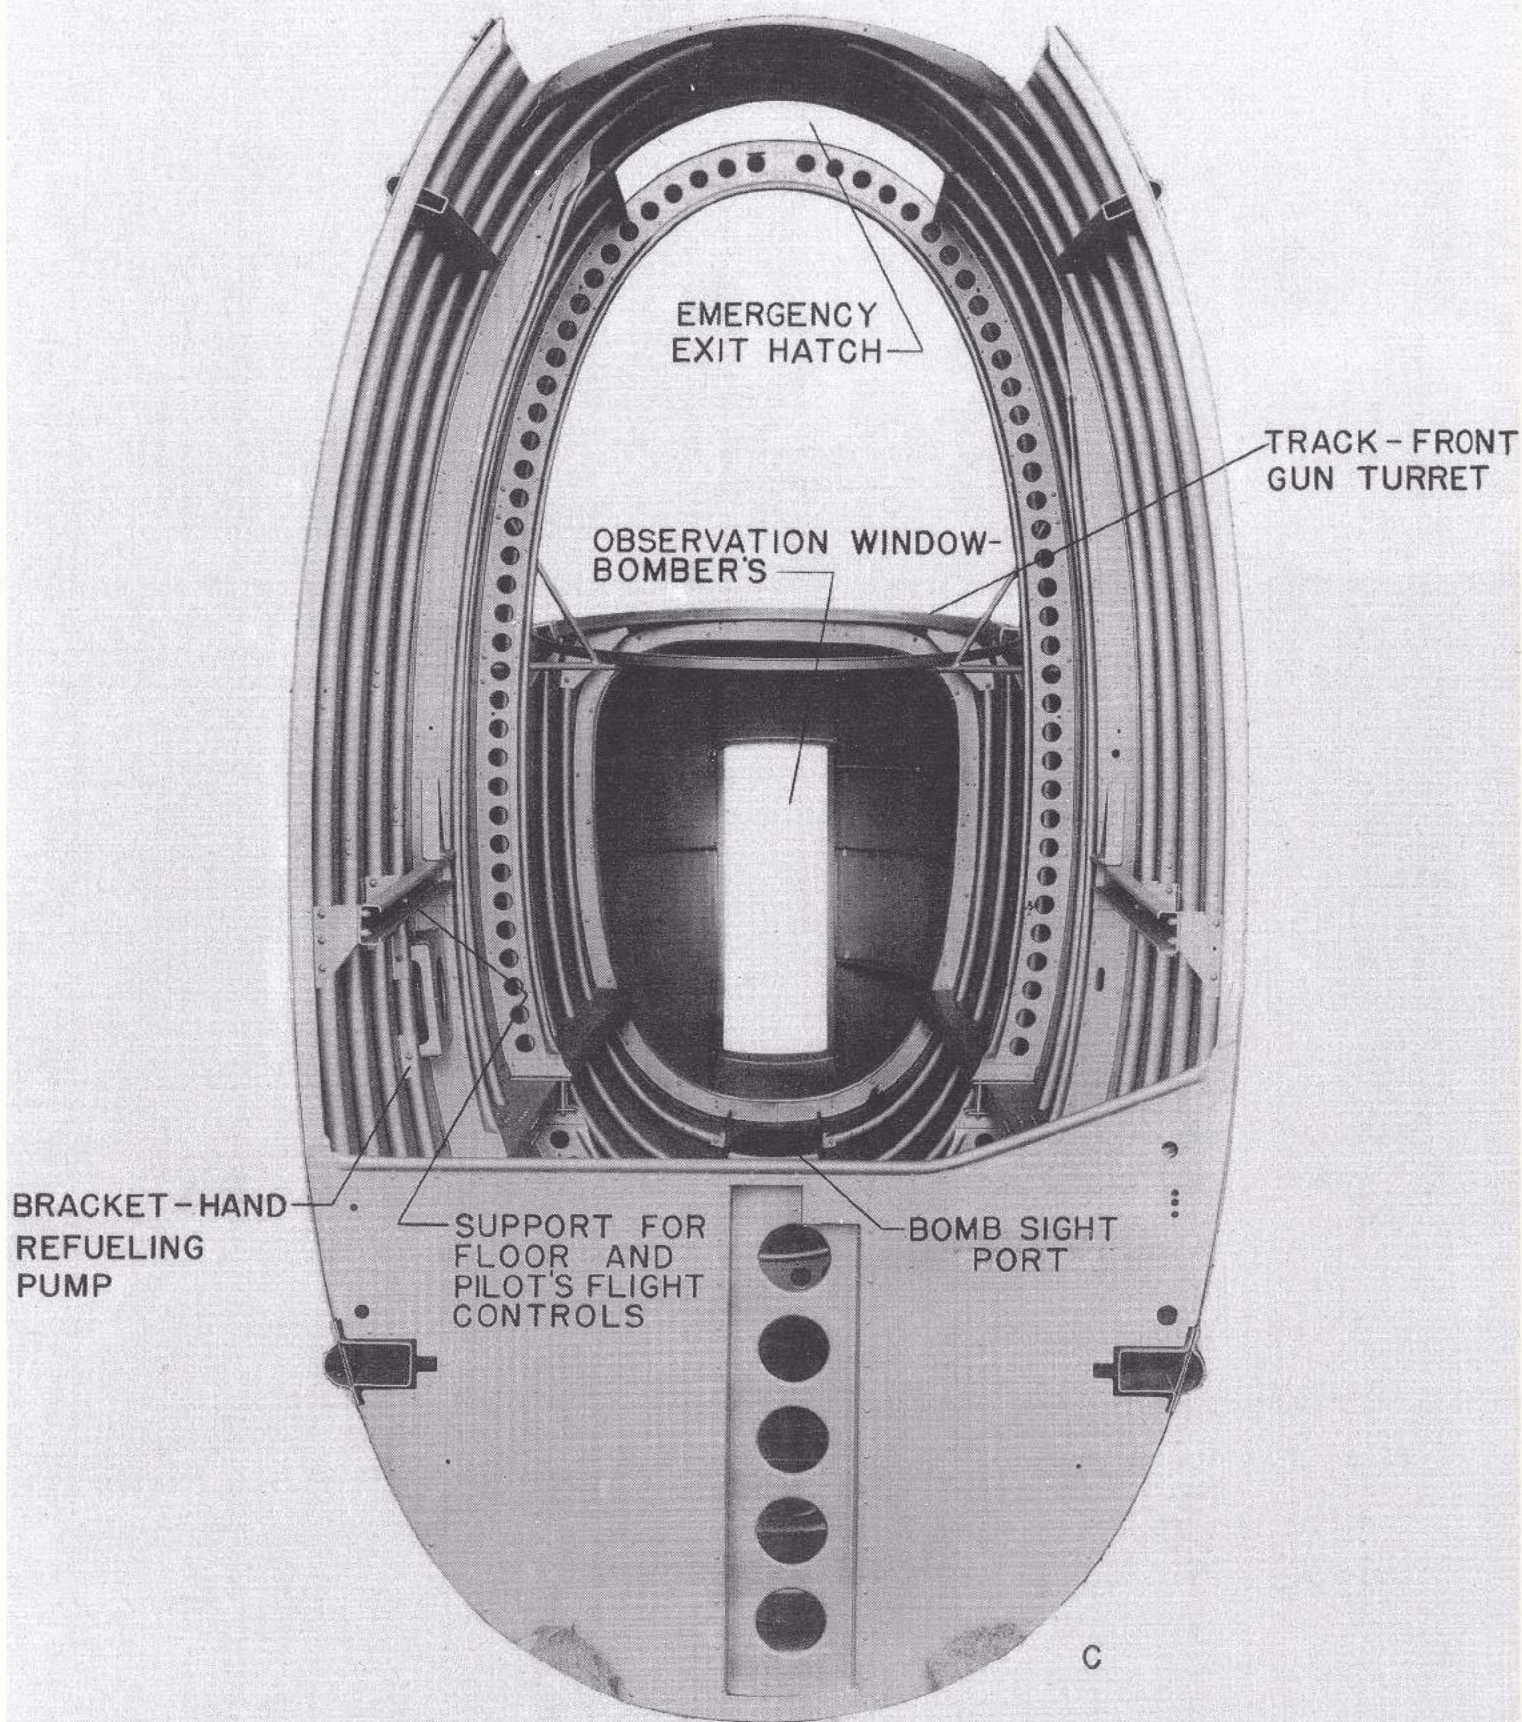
FUSELAGE STRUCTURE - FRONT SECTION - LOOKING FORWARD
